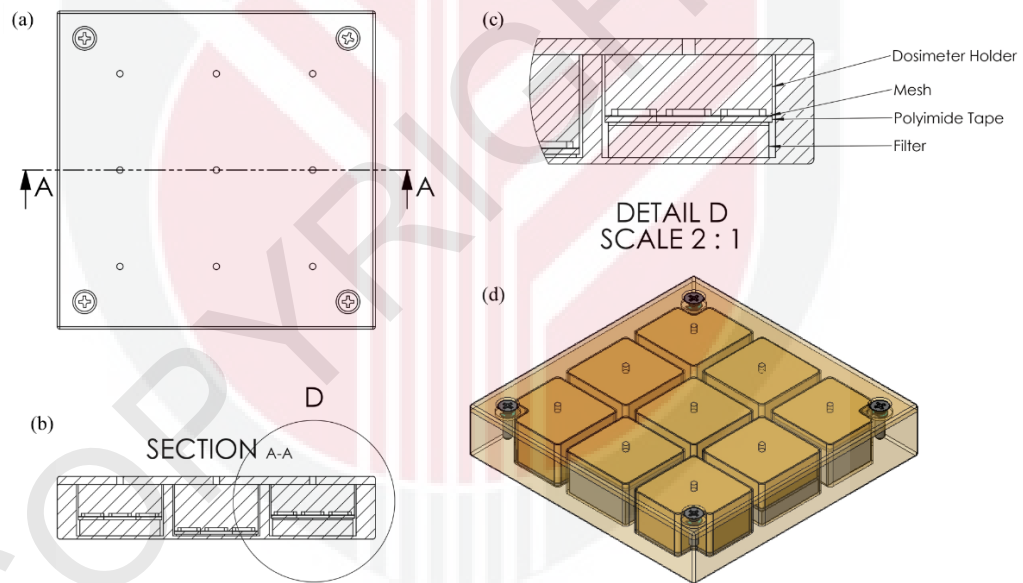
Assembled SOFPADS design for the fifth iteration: (a) Bottom view, (b) side view from A point of view in (a), (c) enlarged view of circle in (b), (d) orthographic view (from the bottom of the model)
